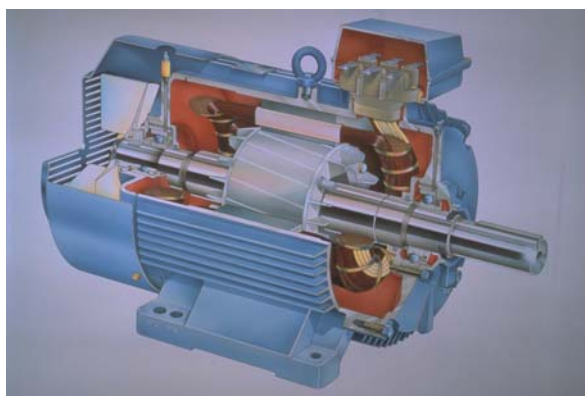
Cut Away View of a Three Phase Squirrel Cage Induction motor
